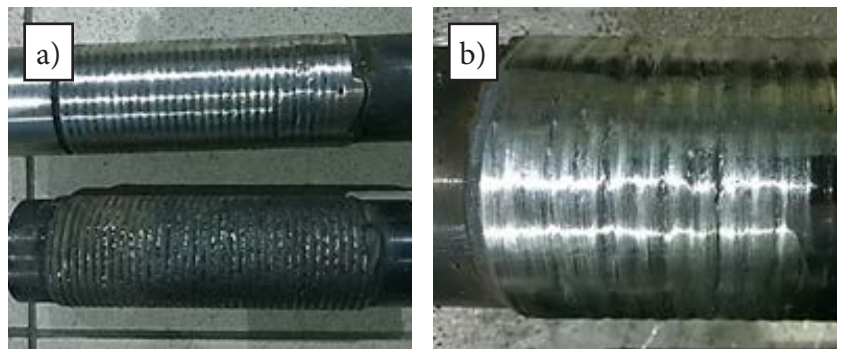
Irregular excess weld metal of the corrosion-resistant MAG (135) method-surfaced layer on the shaft (ϕ 70 mm): a) main view of the shank after surfacing and mechanical treatment, b) fragment of the surfaced layer surface after turning to a required dimension
